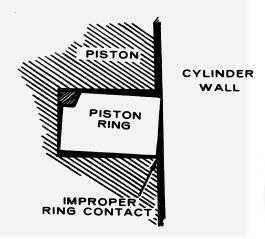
NEW RING IN WORN PISTON RING GROOVE
